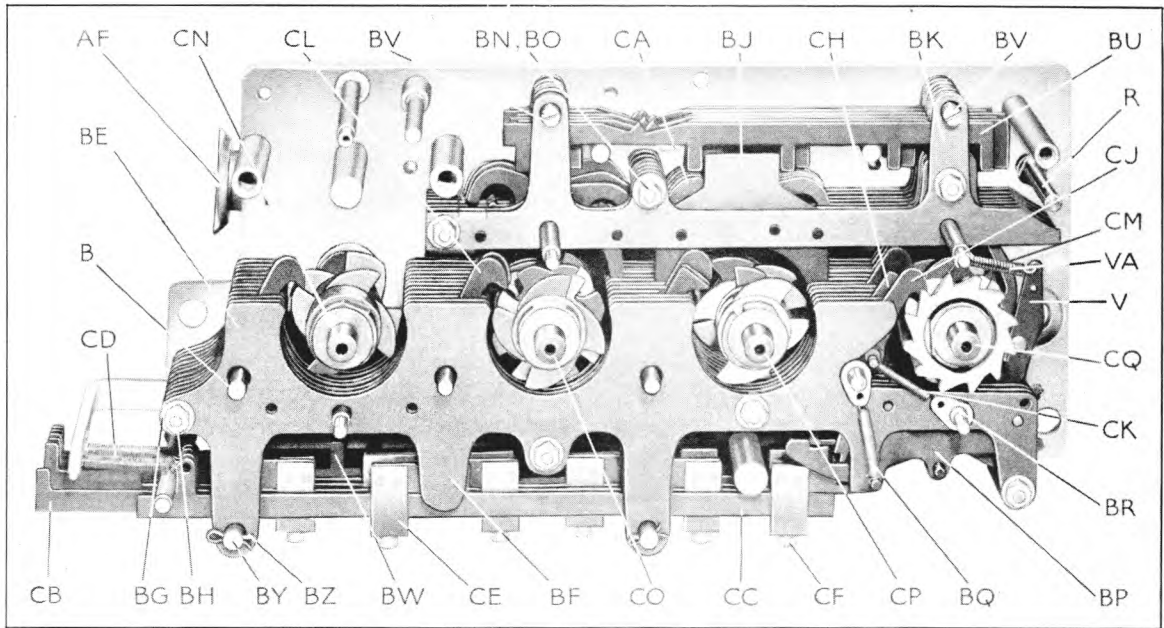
TRANSFER UNIT PARTIAL ASSEMBLY (For C.T. Keyboards)
